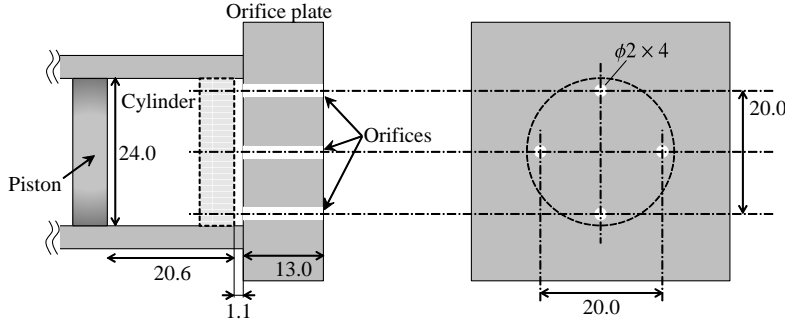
Piston synthetic jet actuator with four orifice holes. All dimensions are in mm.
